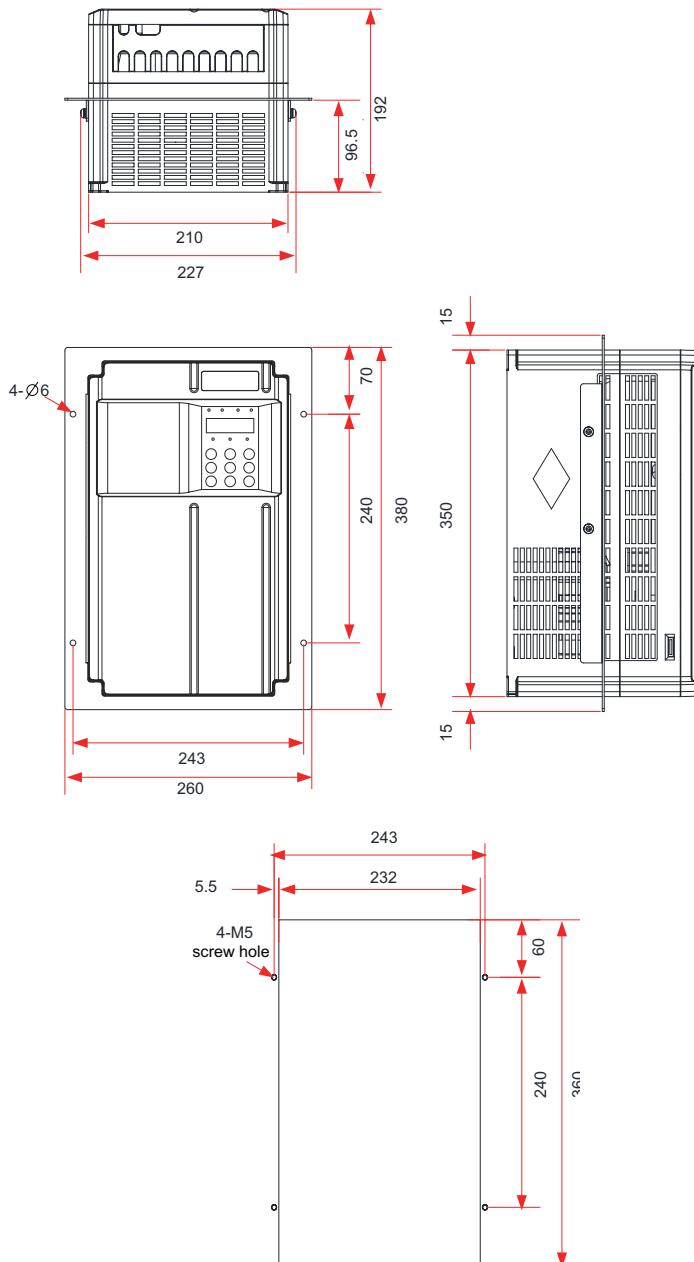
Through-hole mounting bracket and mounting hole dimensions for 18.5–22 kW AC drive models (mm)
